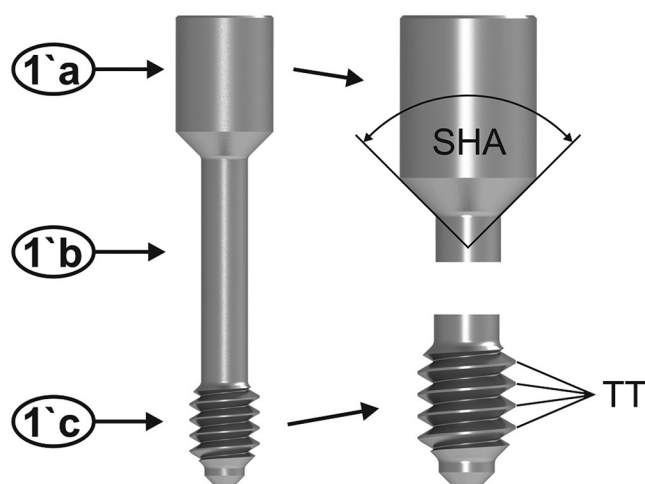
#1'a screw head; #1'b screw shaft; #1'c screw thread, SHA of 90 degrees; 4 TTs. SHA, screw head angle; TTs, thread turns.
